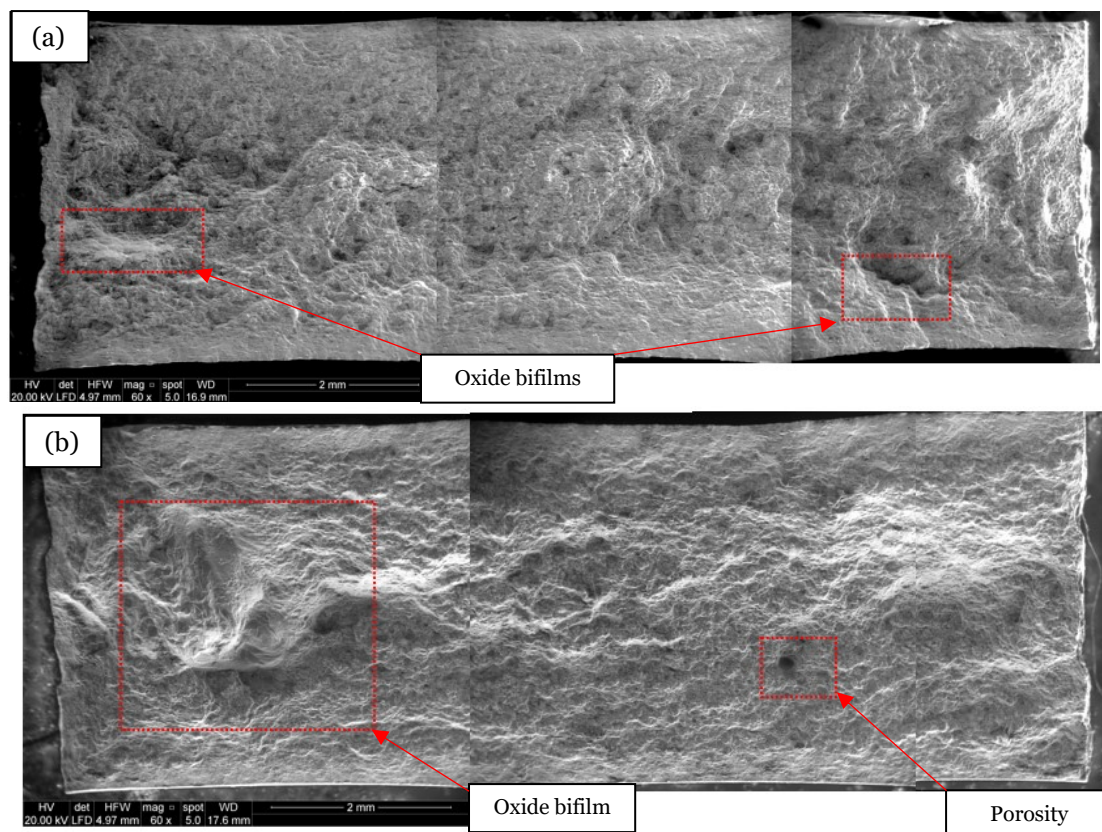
TAX (a) left plate sample (b) right plate sample, both with visual defects on the fracture surface.
